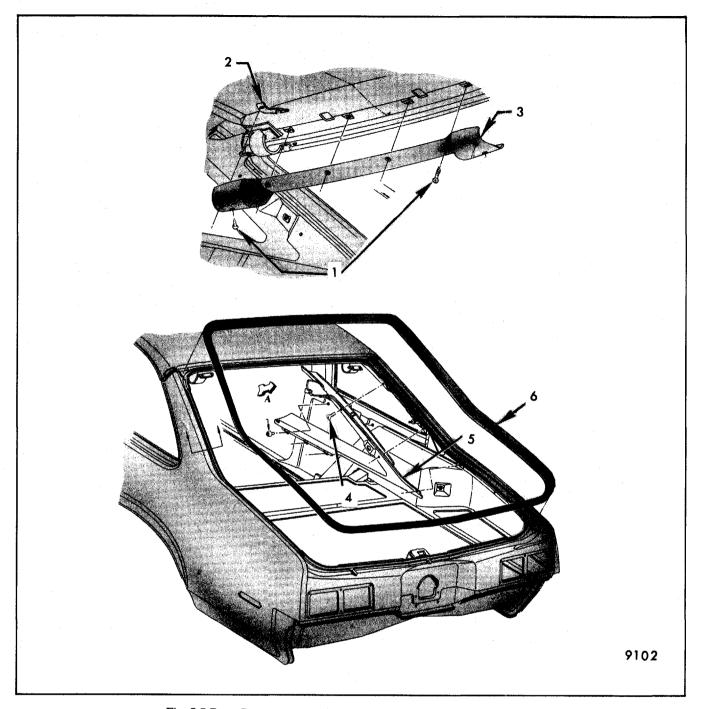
Rear Compartment Trim and Weatherstrip Removal, X-17 Style
